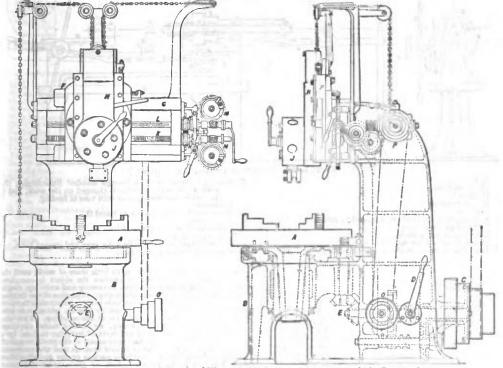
Boring and Turning Mill, vertical lathe. (Webster Bennett, Ltd., Coventry.)
